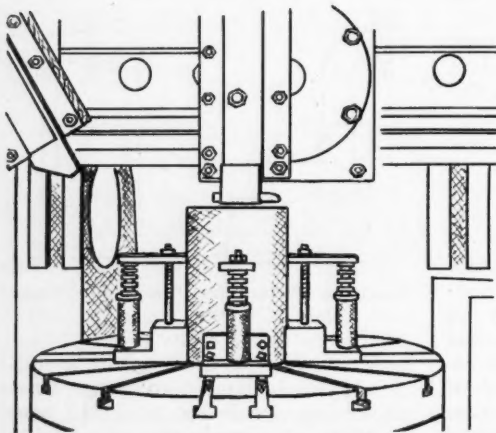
Locomotive Valve Bushing Set Up for Boring
